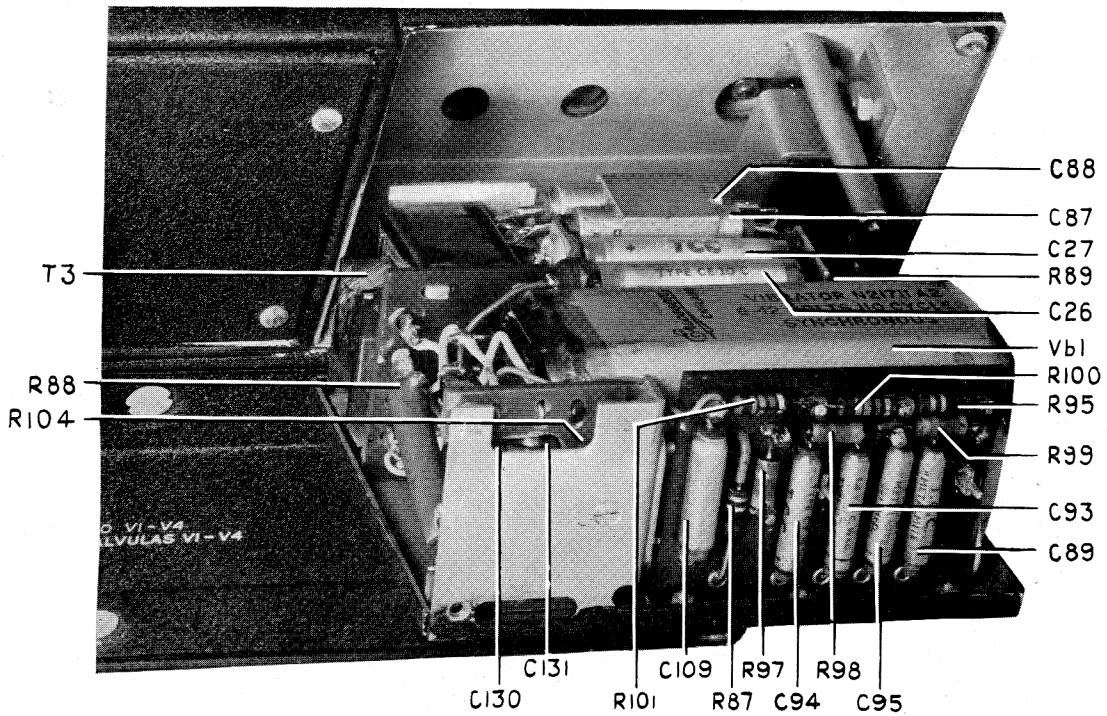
RECEIVER TYPE AD.7092. COMPONENT LOCATION, VIBRATOR ASSEMBLY.
